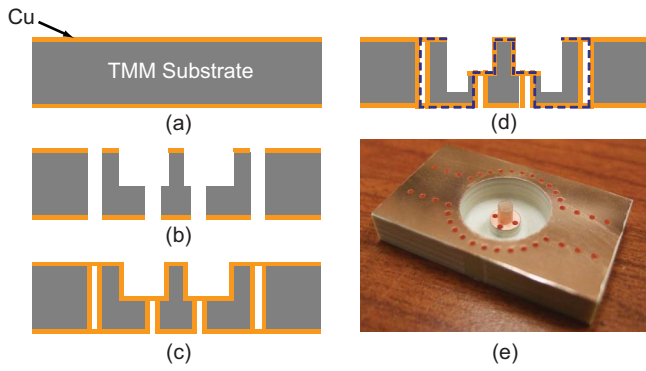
Fabrication process for evanescent-mode cavity: (a) TMM^{\circledR} -3 substrate with double side copper laminate; (b) Via and post milling; (c) Cu plating; (d) Cavity milling; (e) Fabricated cavity piece. The dashed line in (d) represent the boundary of the electromagnetic resonant cavity.
